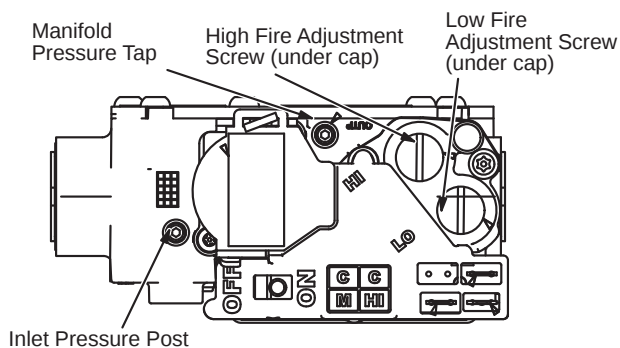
White Rodgers Gas Valve (Gas Valve Shown in ON Position)
